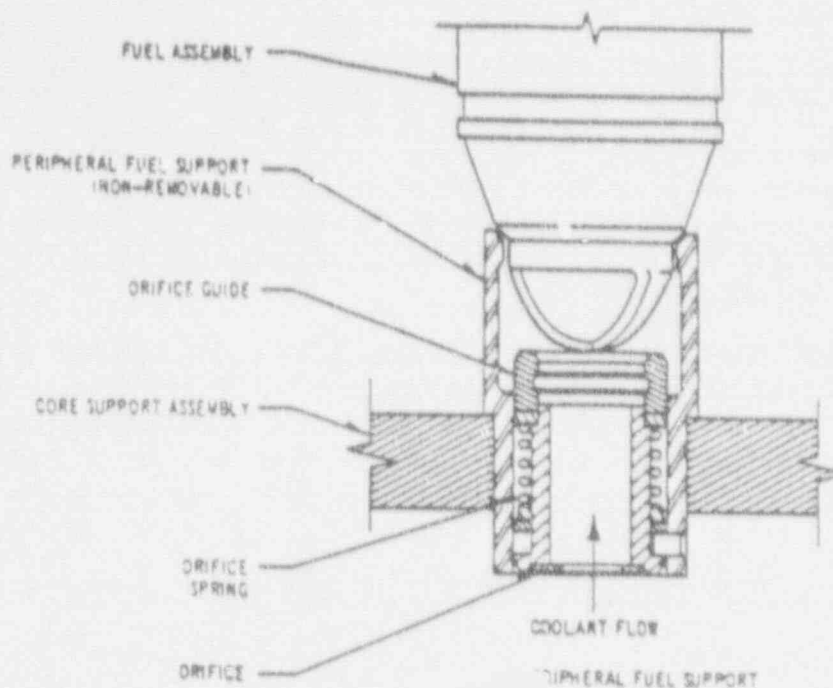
Orifice arrangement for the outer fuel assemblies, the only assemblies supported by the core plate.
